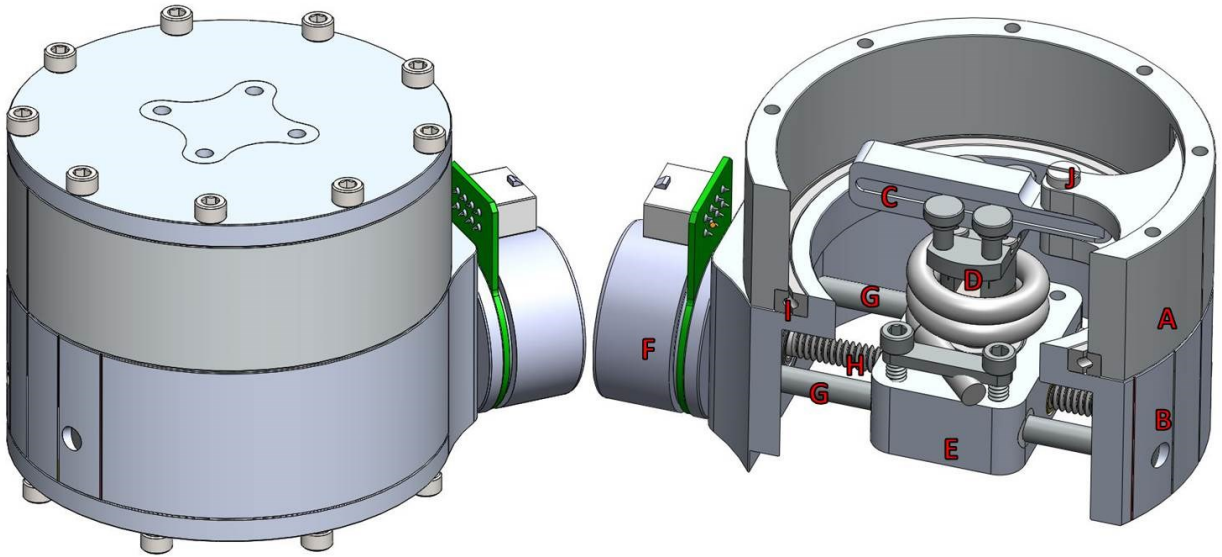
Variable stiffness torsion device. A) Upper Housing, B) Lower Housing, C) Lever Arm, D) Carriage, E) Spring Carrier, F) Electric Motor, G) Guide Rail (2x), H) ACME Lead Screw, I) Main Bearing
